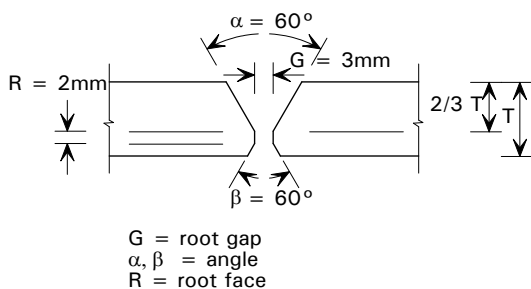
Typical asymmetric double V flange plate butt weld joint
